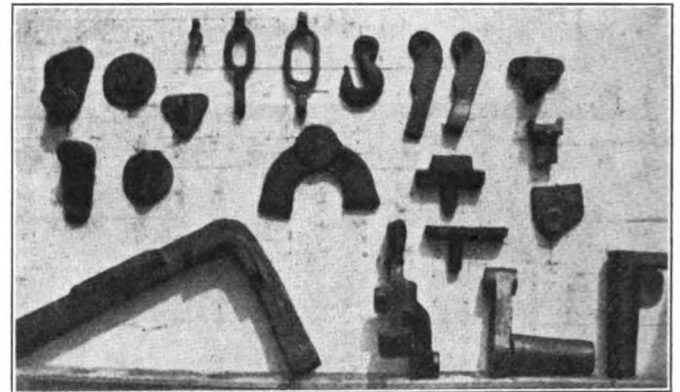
THE STEAM HAMMER MAY BE USED FOR STAMP FORGINGS
